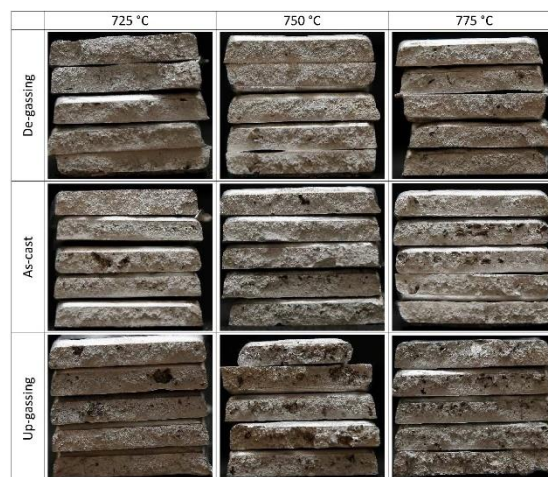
K-mold samples fracture surfaces on different conditions (de-gassing, as-cast and up-gassing) and 725, 750 and 775 °C casting temperatures
